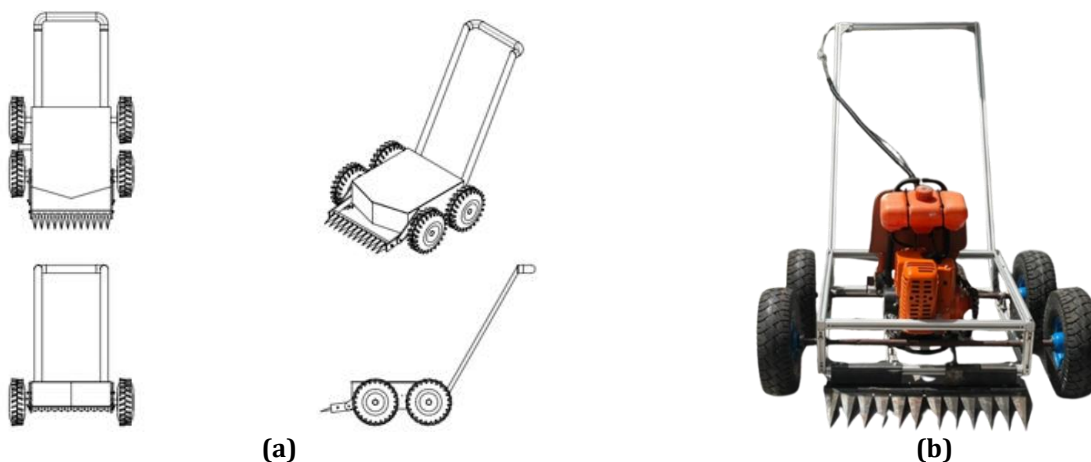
Semi-Auto Lemongrass Harvesting Machine (a) Isometric drawing (b) Final prototype
